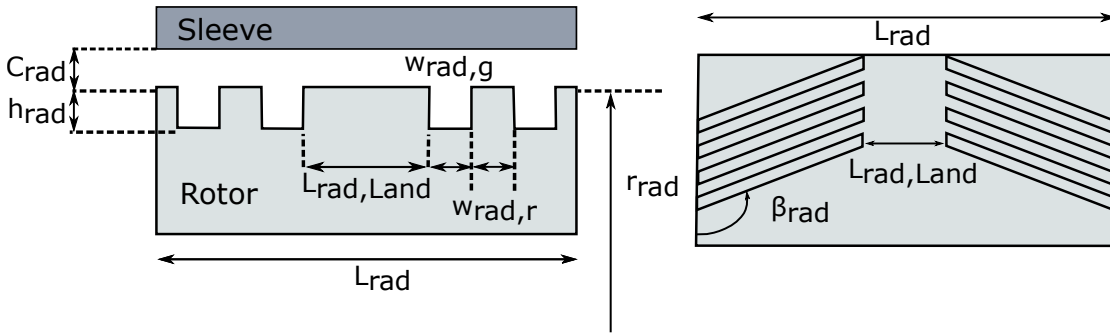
Schematic of a Herringbone Grooved Journal Bearing (HGJB)
